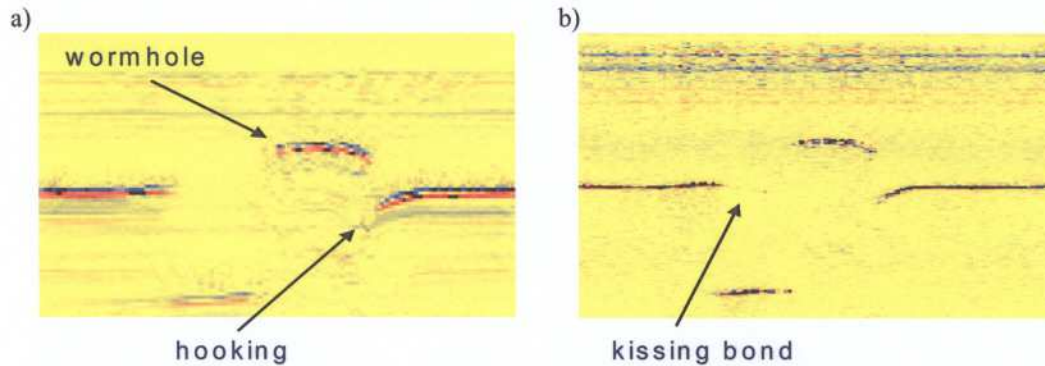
Cross-section of the lap joint in Figure 4, with inspection from the far side of the tool. SAFT image using a) immersion and b) laser-ultrasonics
